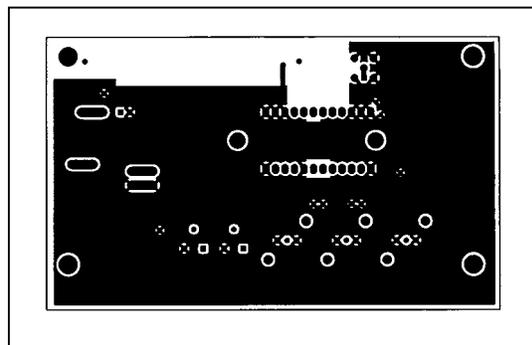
MAX445 EV Kit PC Board Layout—Solder Side
